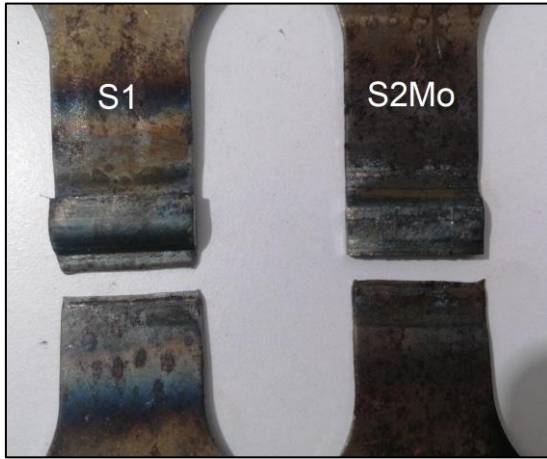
Tensile test specimens. S1 specimen (left), S2Mo specimen (right)
